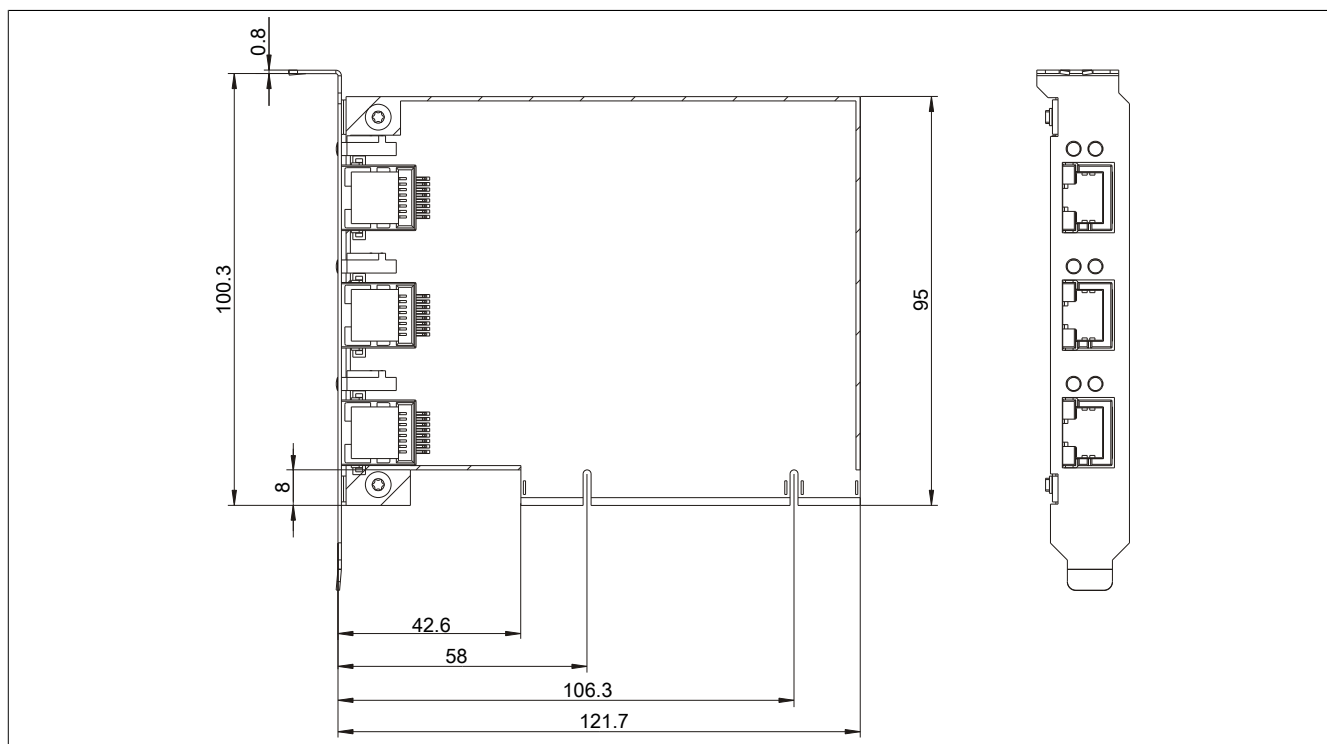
5ACPCI.ETH3-01 - Dimensions
